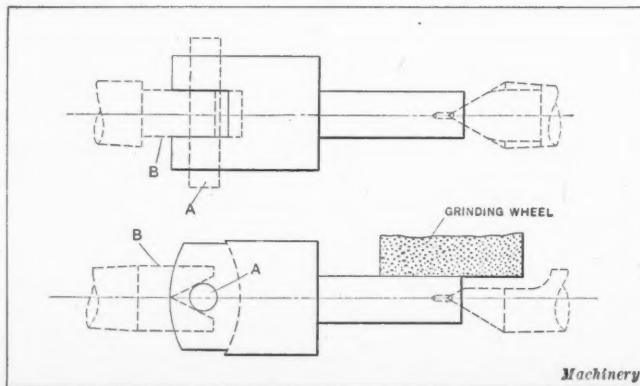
Method of holding Piece having a Center Hole in One End and a Slot in the Other
